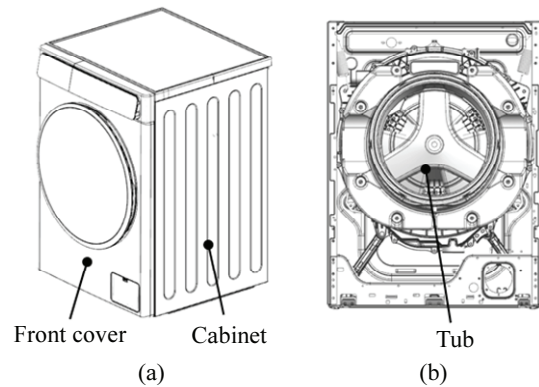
Drum type washing machine: (a) Front cover and cabinet, (b) Tub (Front cover removed)
